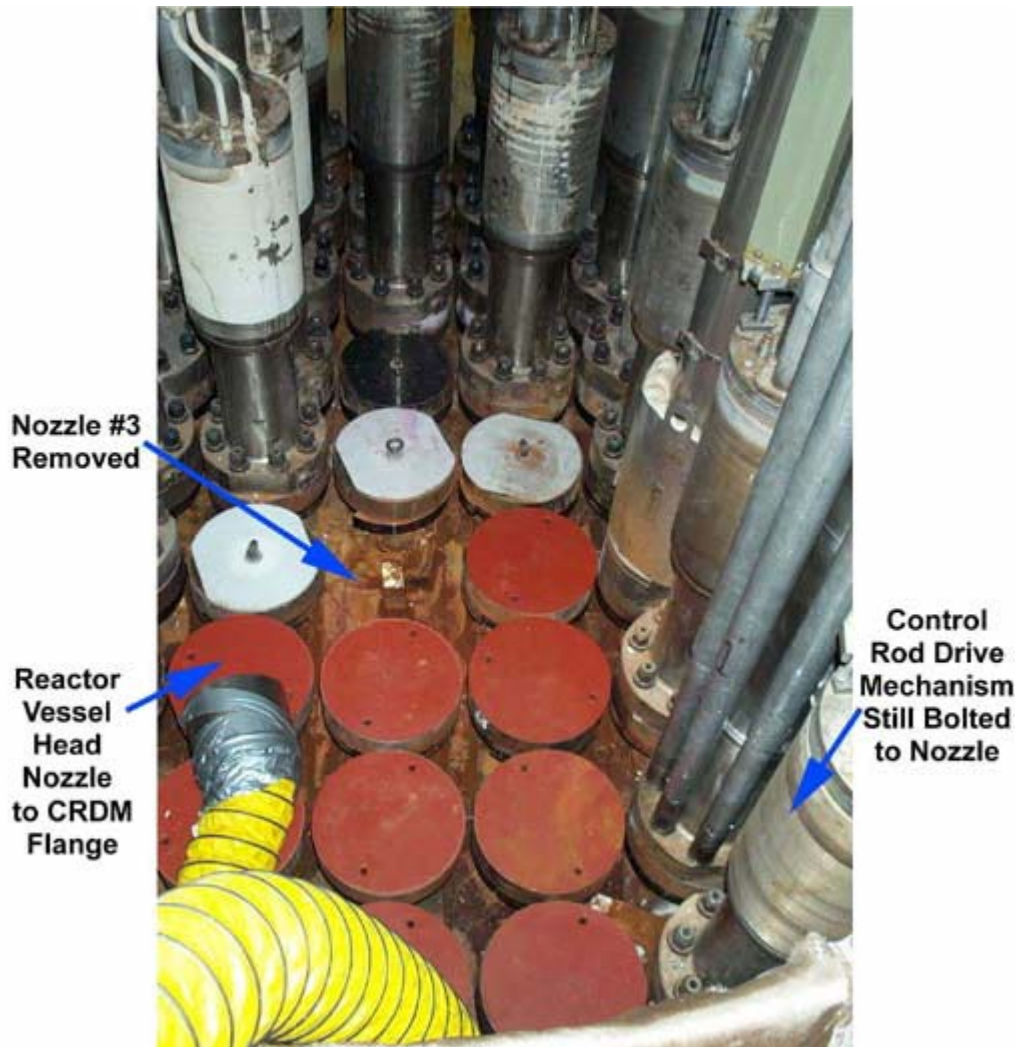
View through the Access Opening Cut in the RPV Head Service Structure above the Support Steel and Insulation Showing the Close Proximity of the CRDM Flanges
